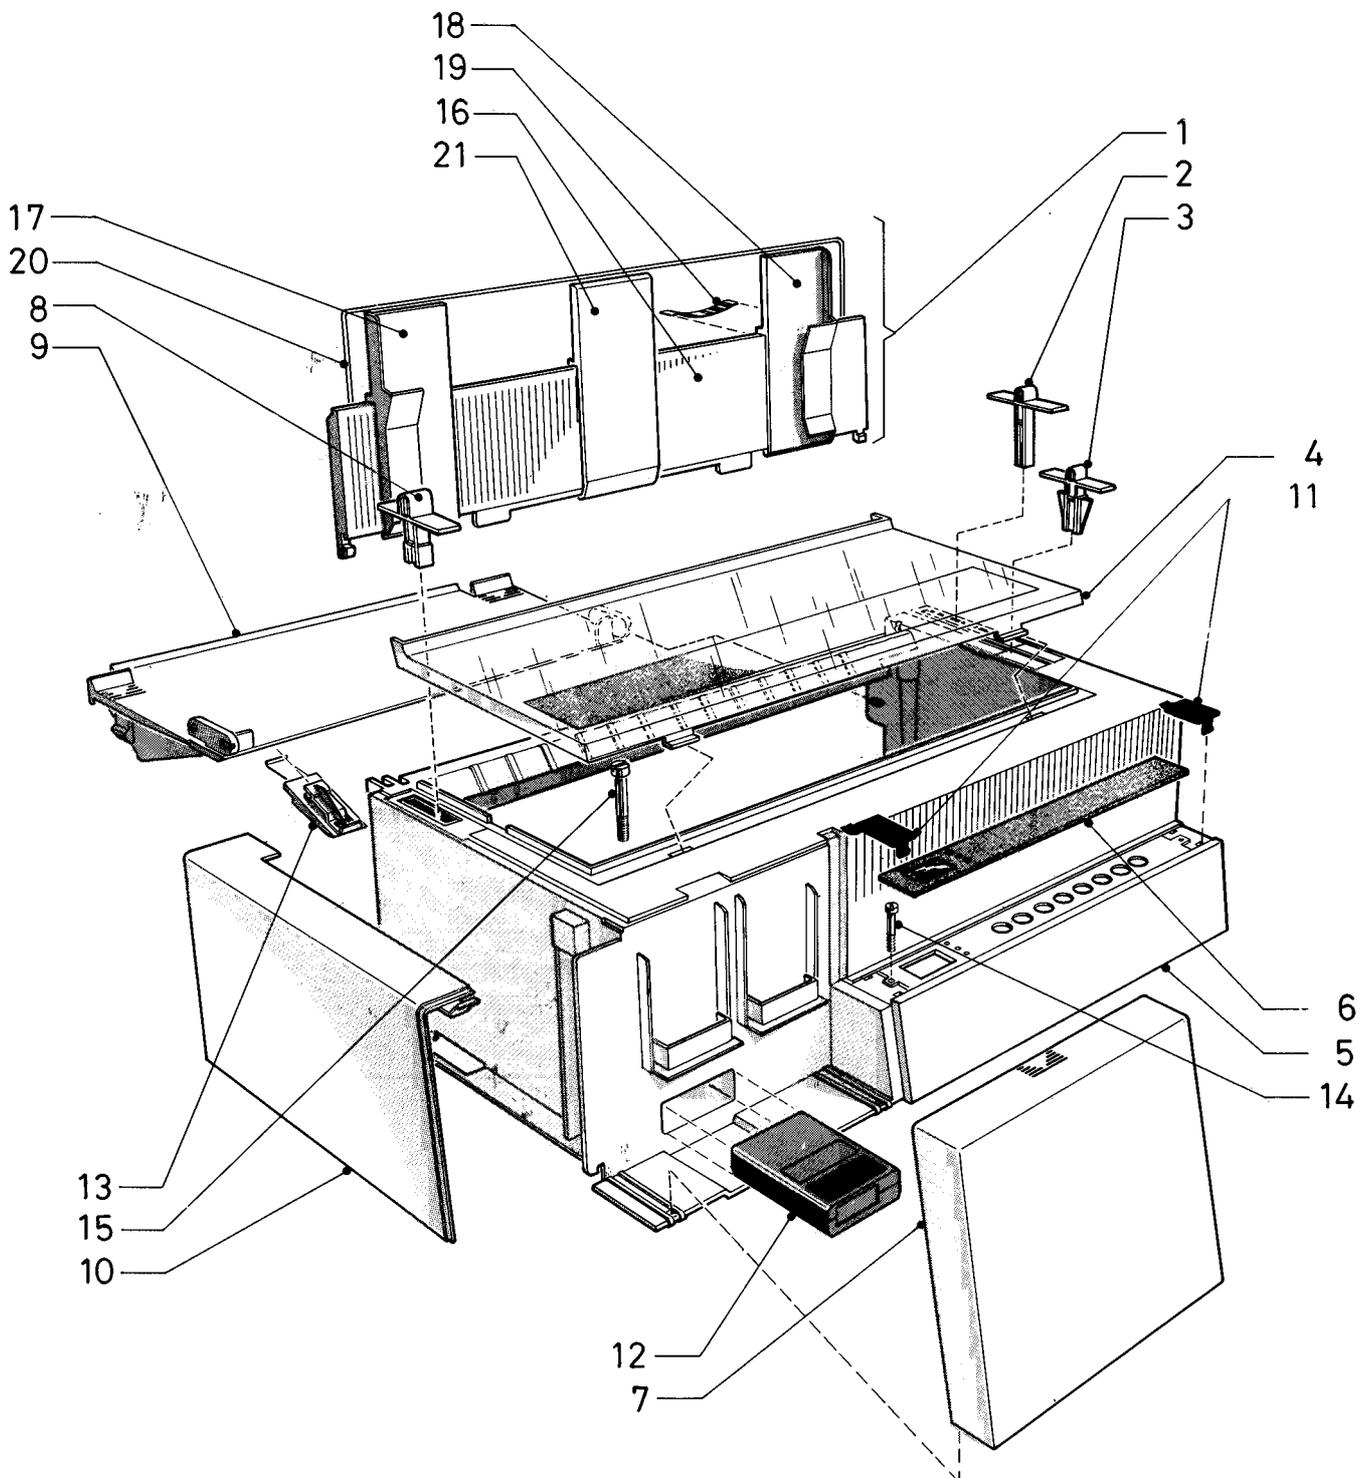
4/40 Covers Assembly and Operator Panel
